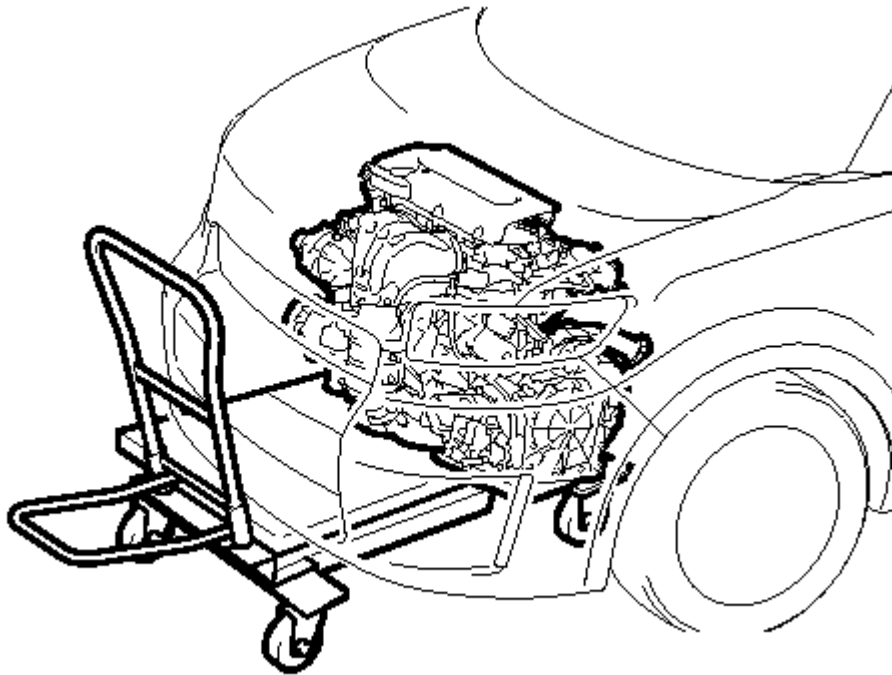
Identifying Engine Mounting Insulator Bolts And Nut
